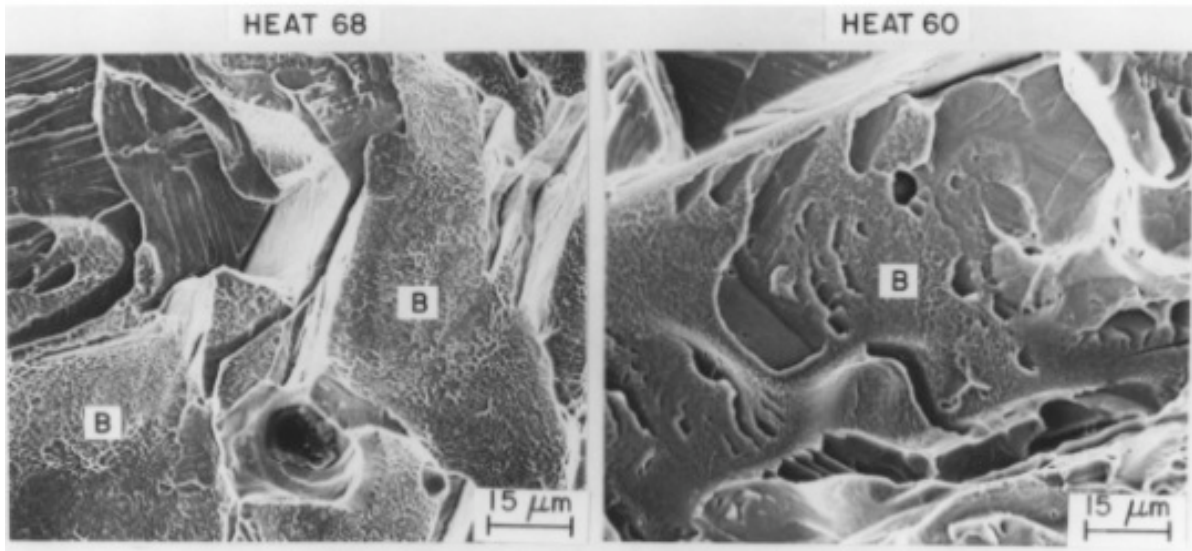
Fracture Surfaces of Impact Test Specimens of Unaged CF-8 Cast Steel Tested at -196°C .
